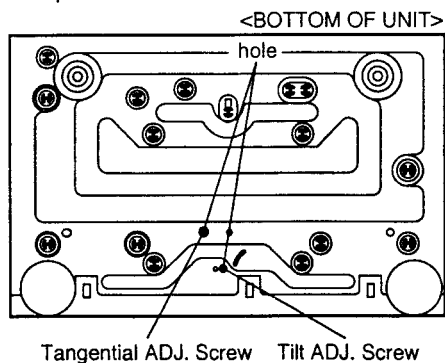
Adjustment Hole of the Bottom Plate
